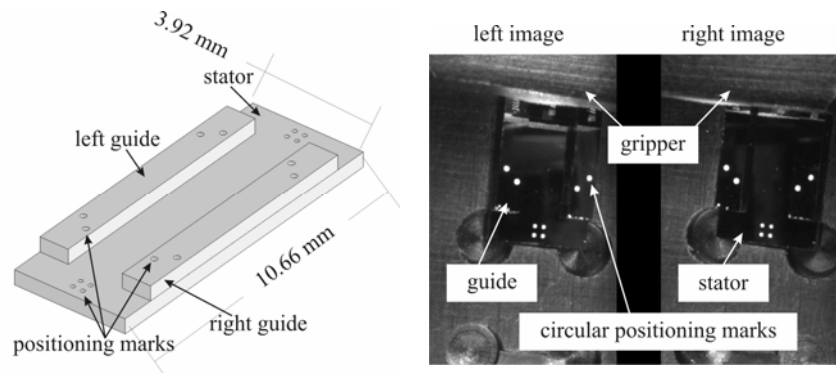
Assembly group guides on stator (left); view of 3D vision sensor (right)
